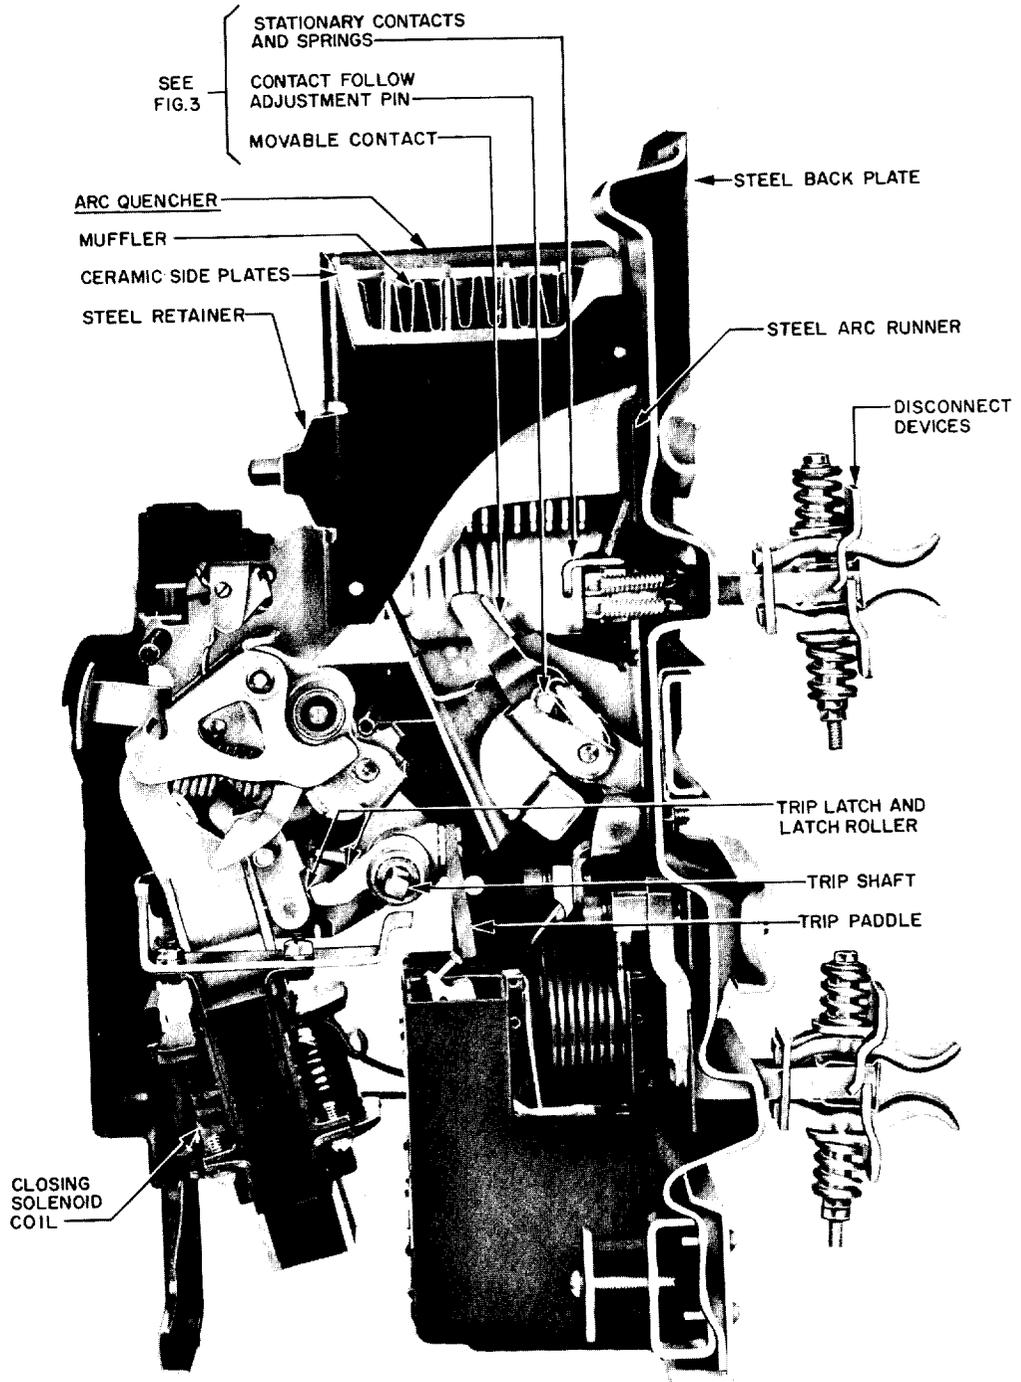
Cut-Away View of Electrically Operated Breakers - Reset Position
